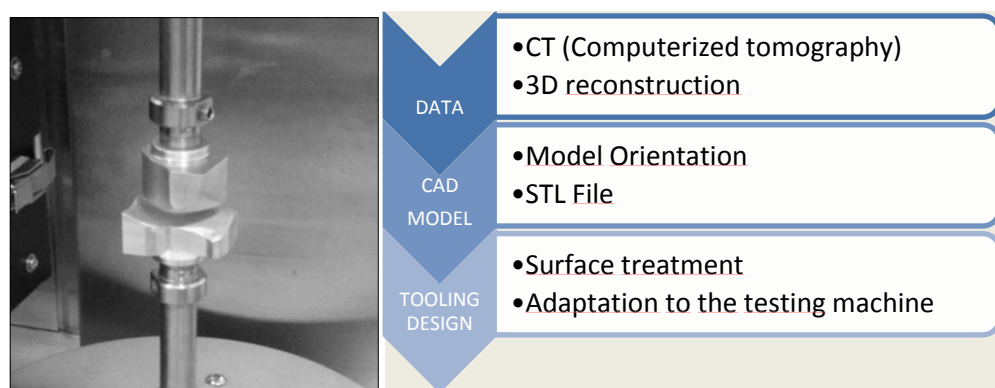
Design of the fixture tool used whole disc tests and steps in the manufacturing process. STL, stereolithographic.
